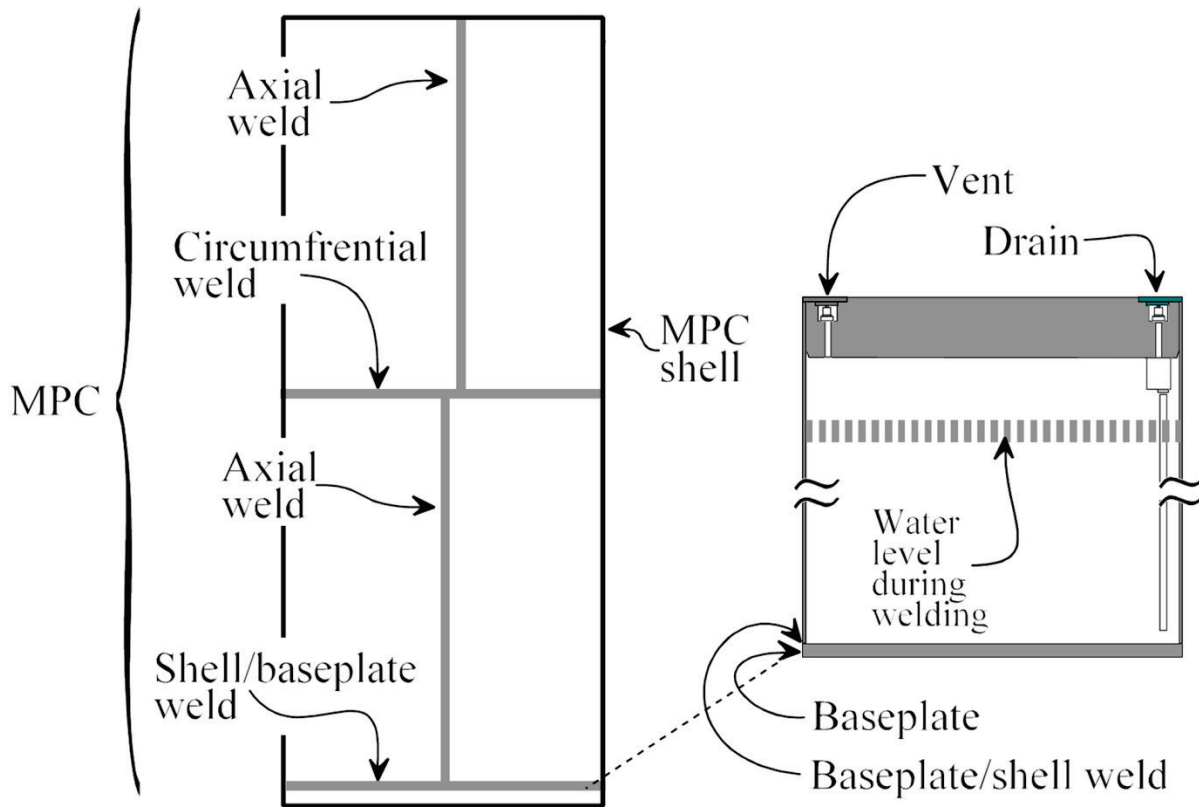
Welds on a Multipurpose Canister (Reproduced from NUREG-1864 [18], Fig. 16)
